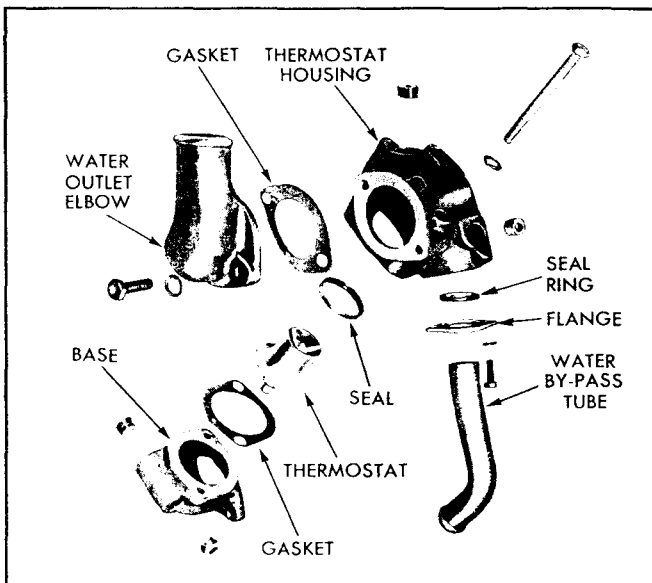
Thermostat Housing Details and Relative Location of Parts (V-Type Engine)
